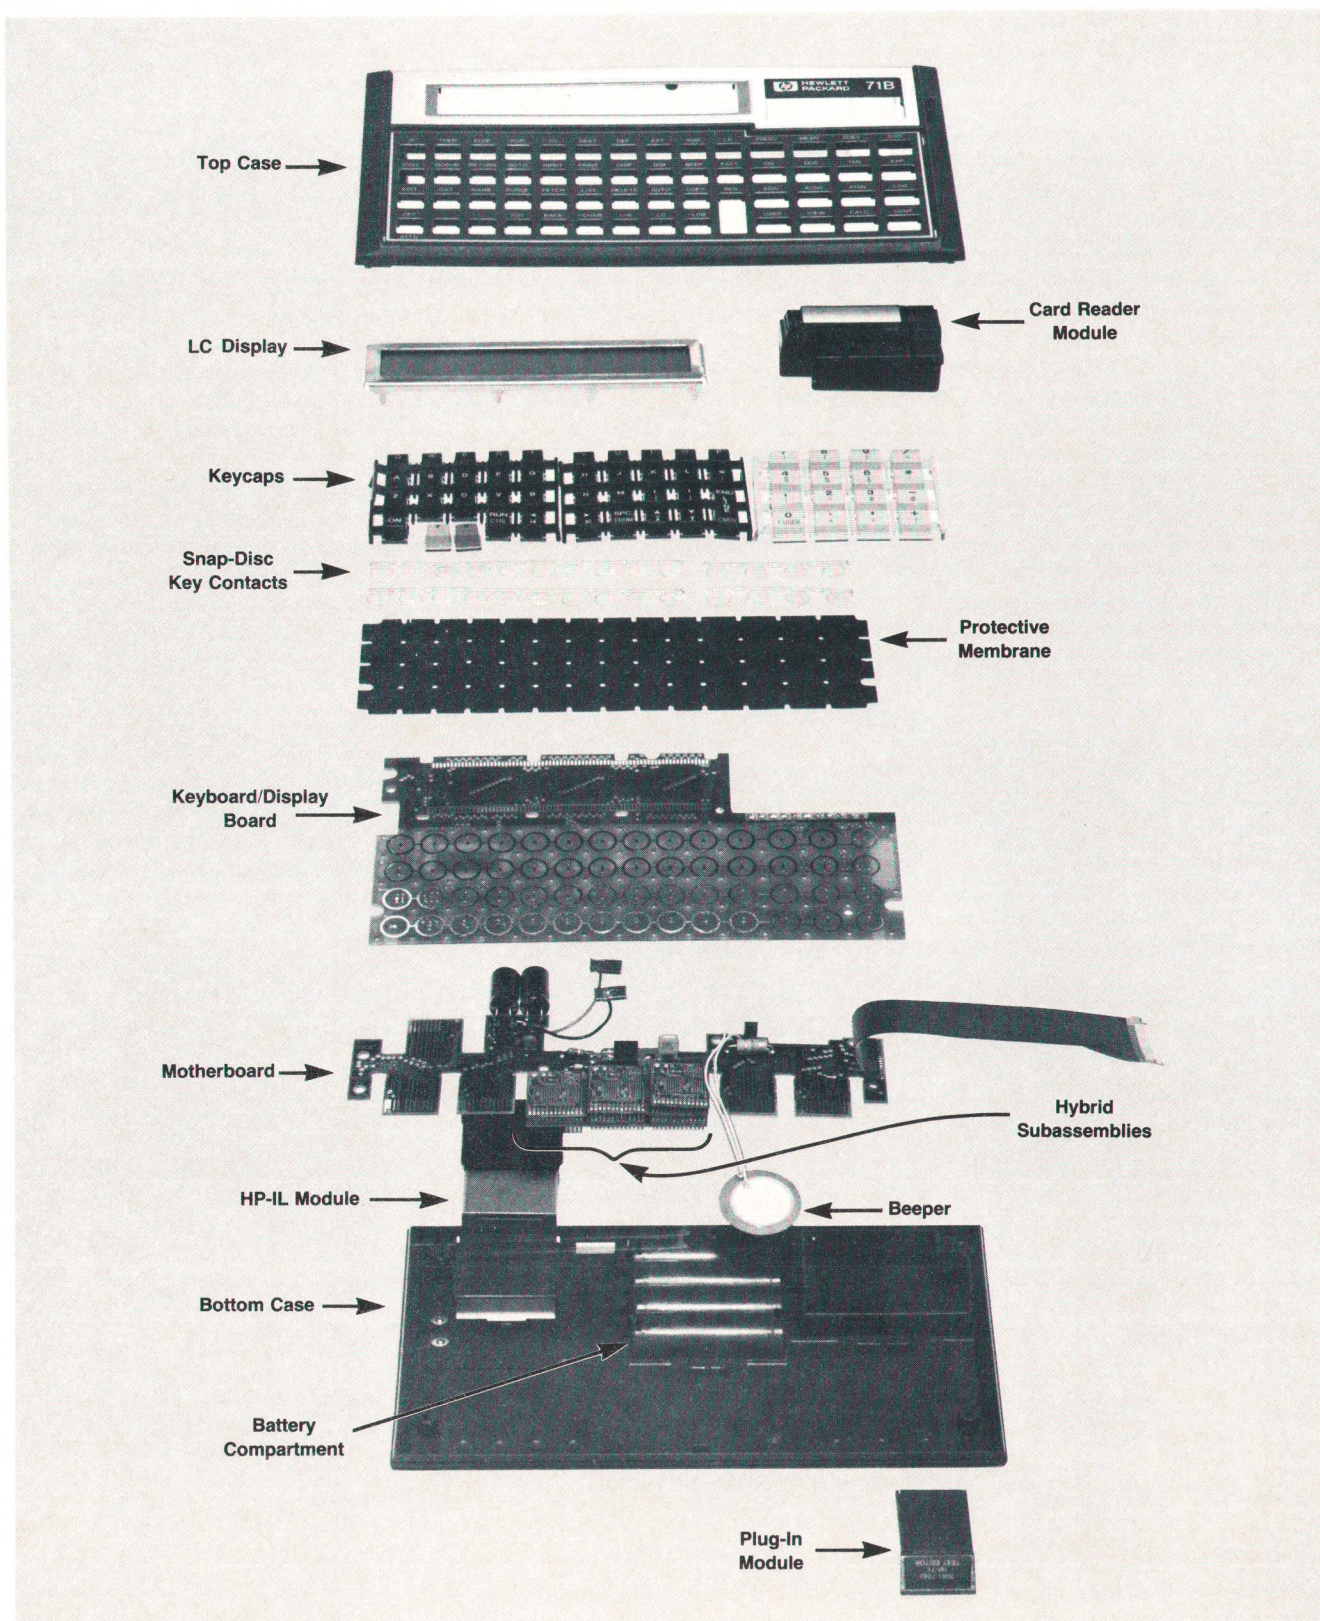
Exploded view of the HP-71B Computer showing the various packaging features. The mainframe is composed of two subassemblies: the top case assembly and the bottom case assembly. The top case assembly contains the keyboard, display, and CPU and display driver circuitry. The bottom case assembly contains the built-in memory, power circuits, and piezoelectric beeper, and accommodates the optional card reader/recorder and other plug-in modules.
